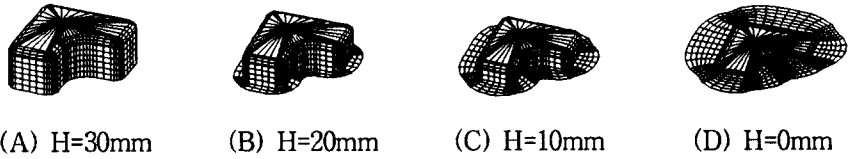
Calculation of blank shape for deep drawing process (H=30mm)
